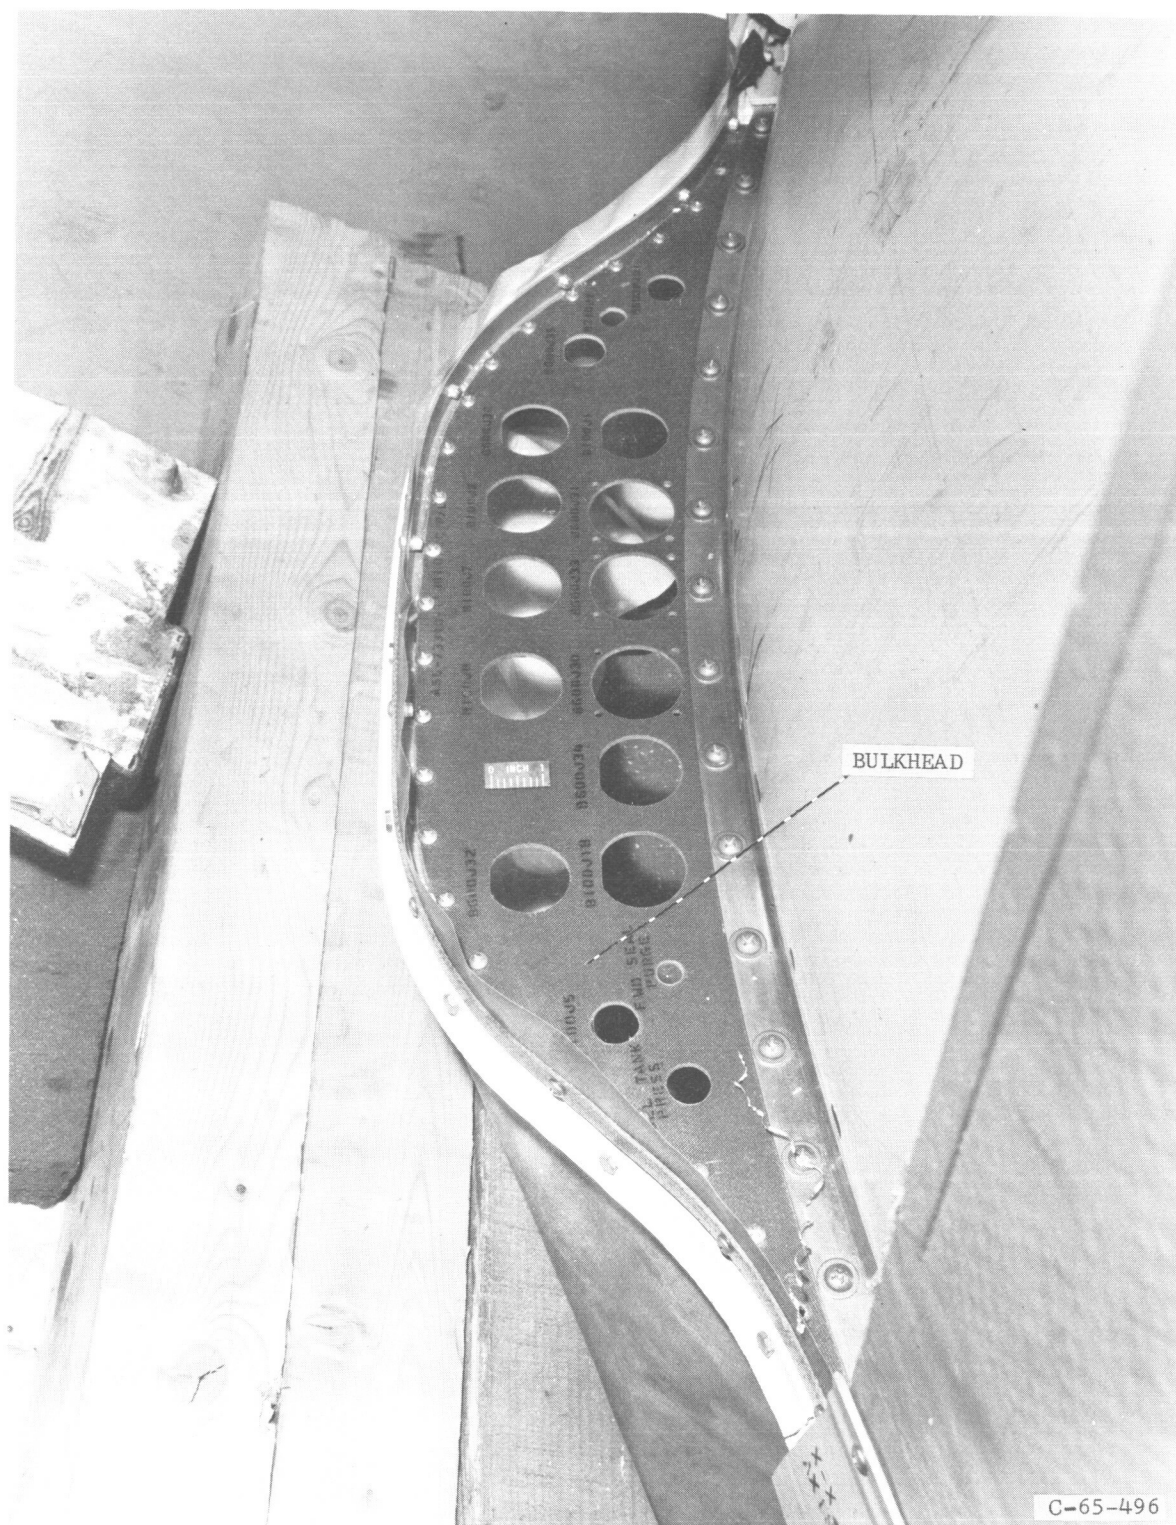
Wiring tunnel bulkhead installation after the hand fit.
